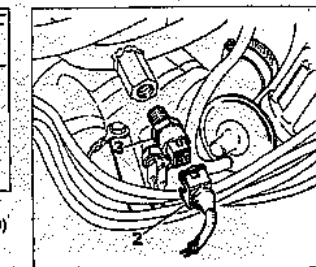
Fuel injection thermistor (3) and plug (2) (Sec 6D)
